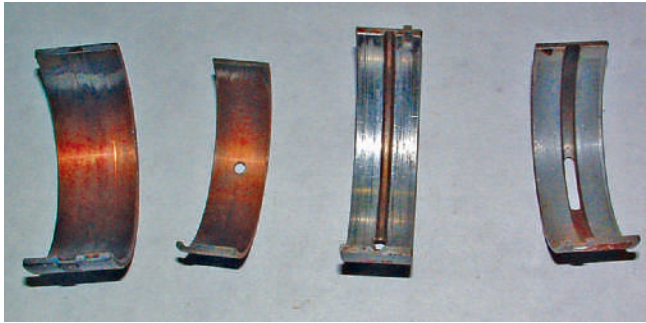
The bearings on the left have no babbitt left, and the ones on the right are slightly worn and scored.
